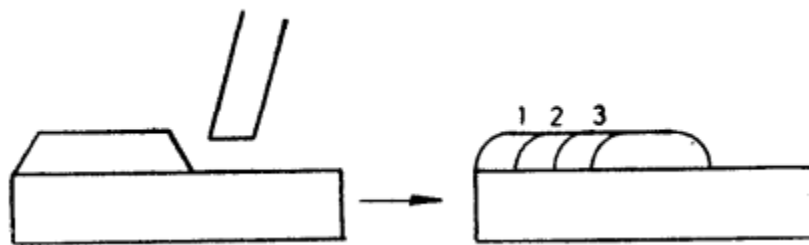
USUAL SEQUENCE OF WELDING
